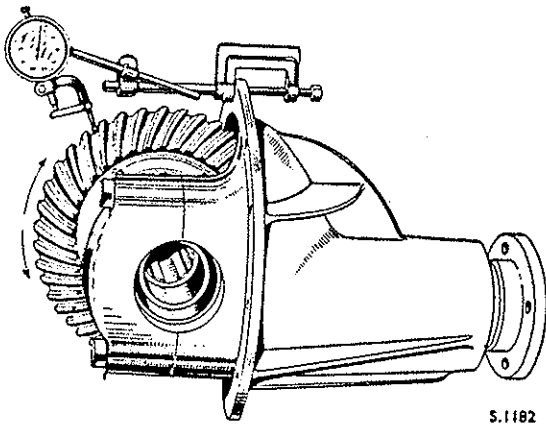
Checking backlash between the crown wheel and bevel pinion with a clock gauge and 90° adaptor
